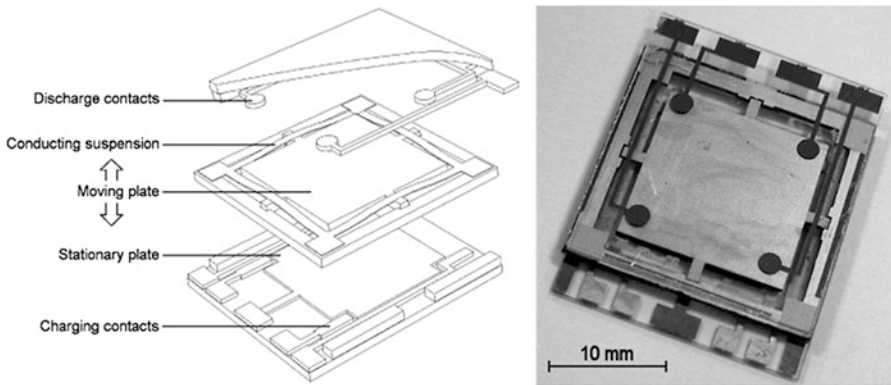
Exploded view (left) and prototype (right) of power generator [6]. Springer Publishing. Reproduced with permission
